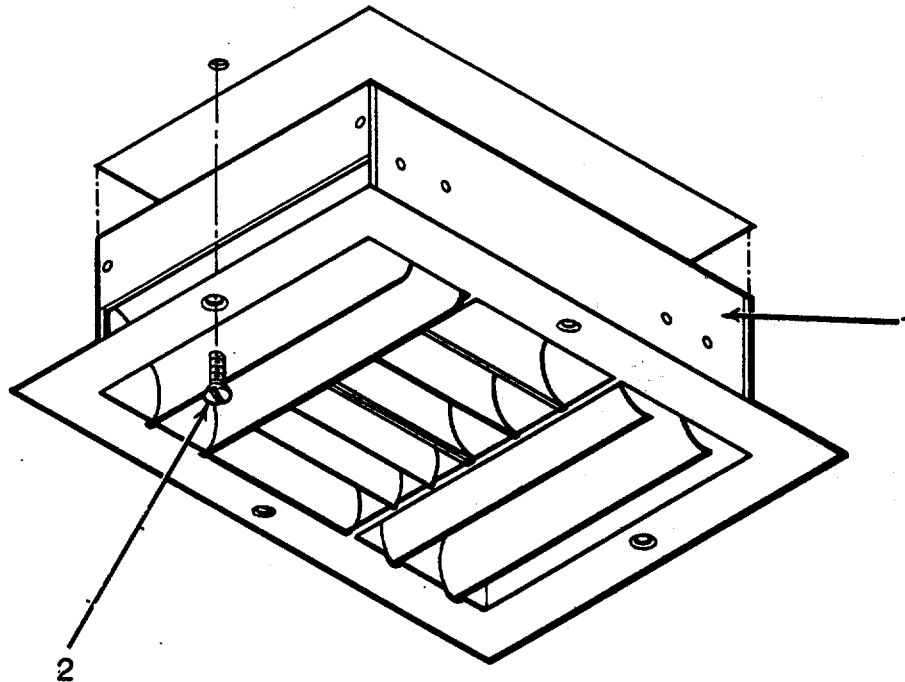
Air Conditioner Ducting Assembly 4-Way Register
